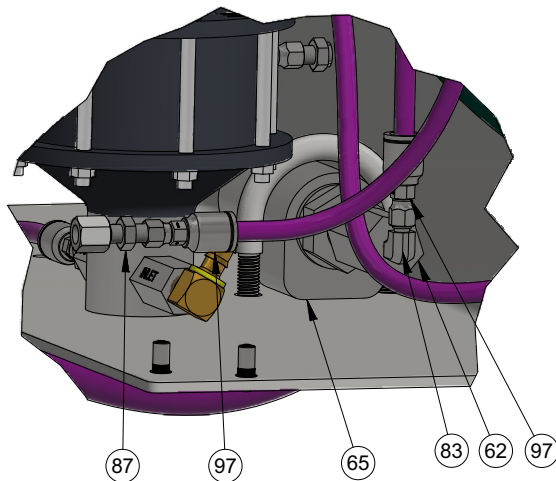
CONSOLE 3 KSI AND 6 KSI HOSE ASSEMBLY (P/N 98223)
